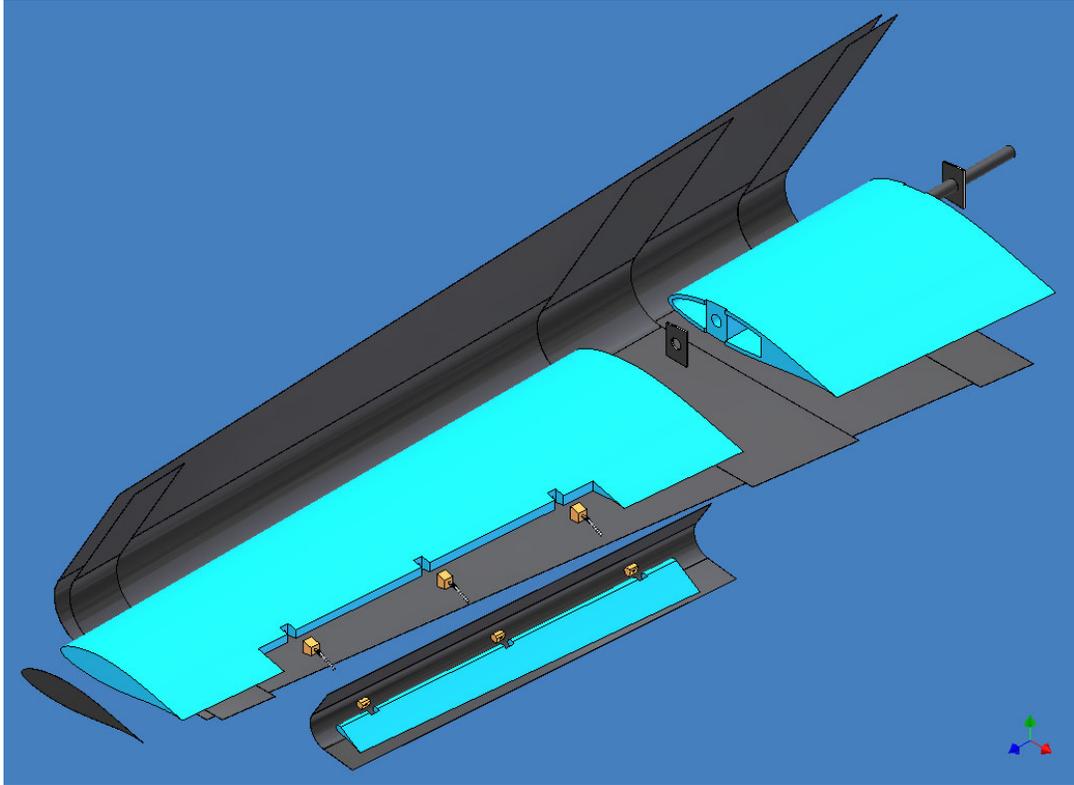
Outboard Wing Construction – explode view (see Figure 2.5).
